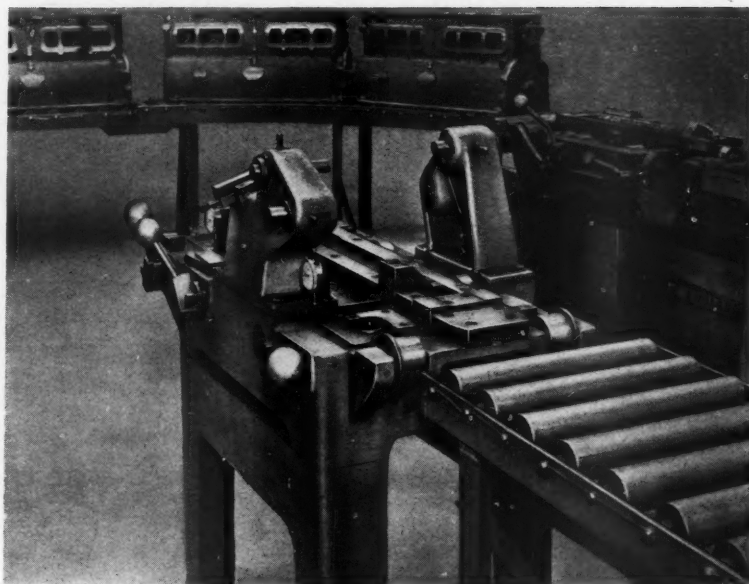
An inspection fixture for part-machined cylinder blocks.
